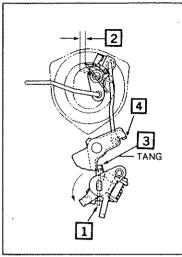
CHOKE UNLOADER ADJUSTMENT
